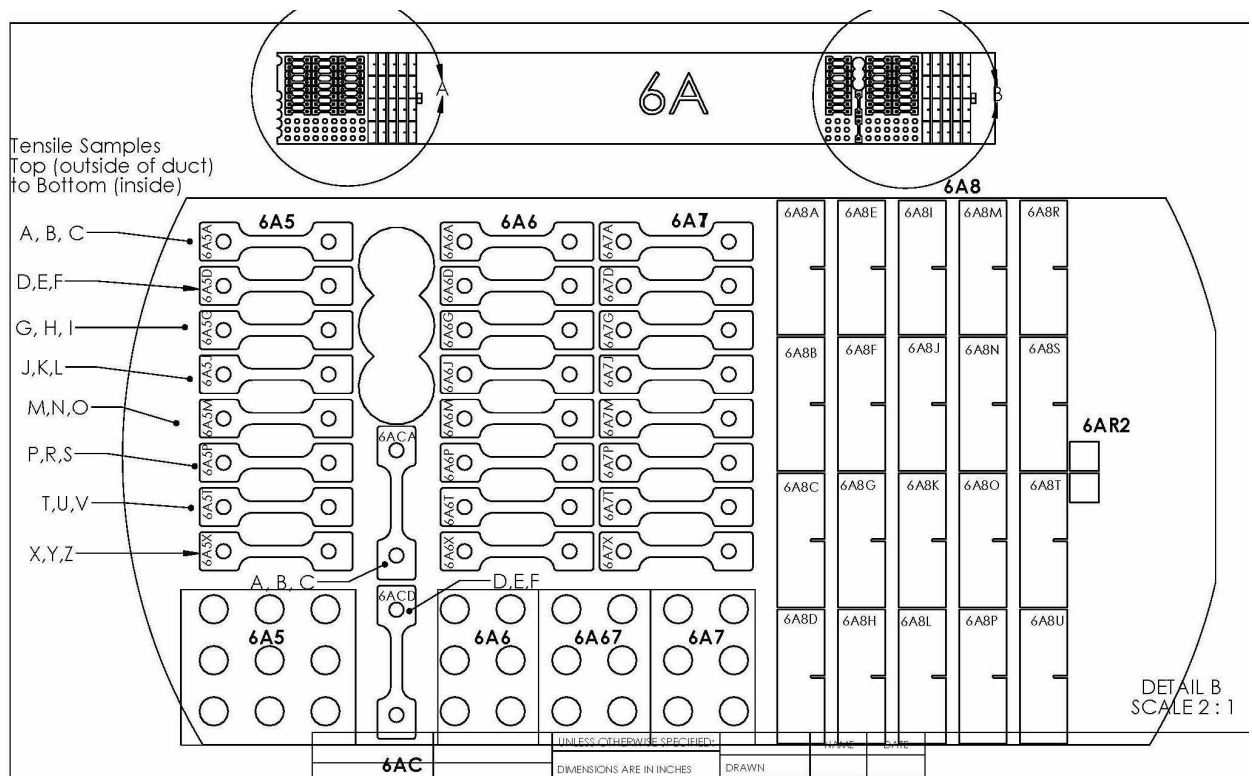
Cut plan from plate 6A of the ACO3 duct. Samples tested were from location 6AC
